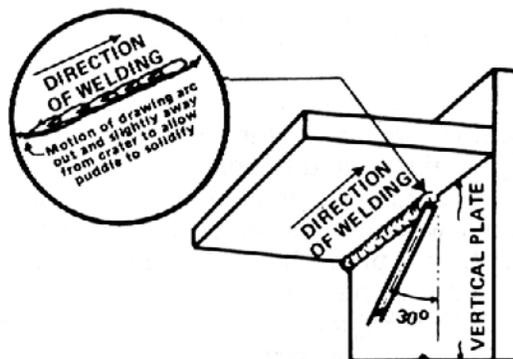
Overhead Tee Weld - Single Pass
